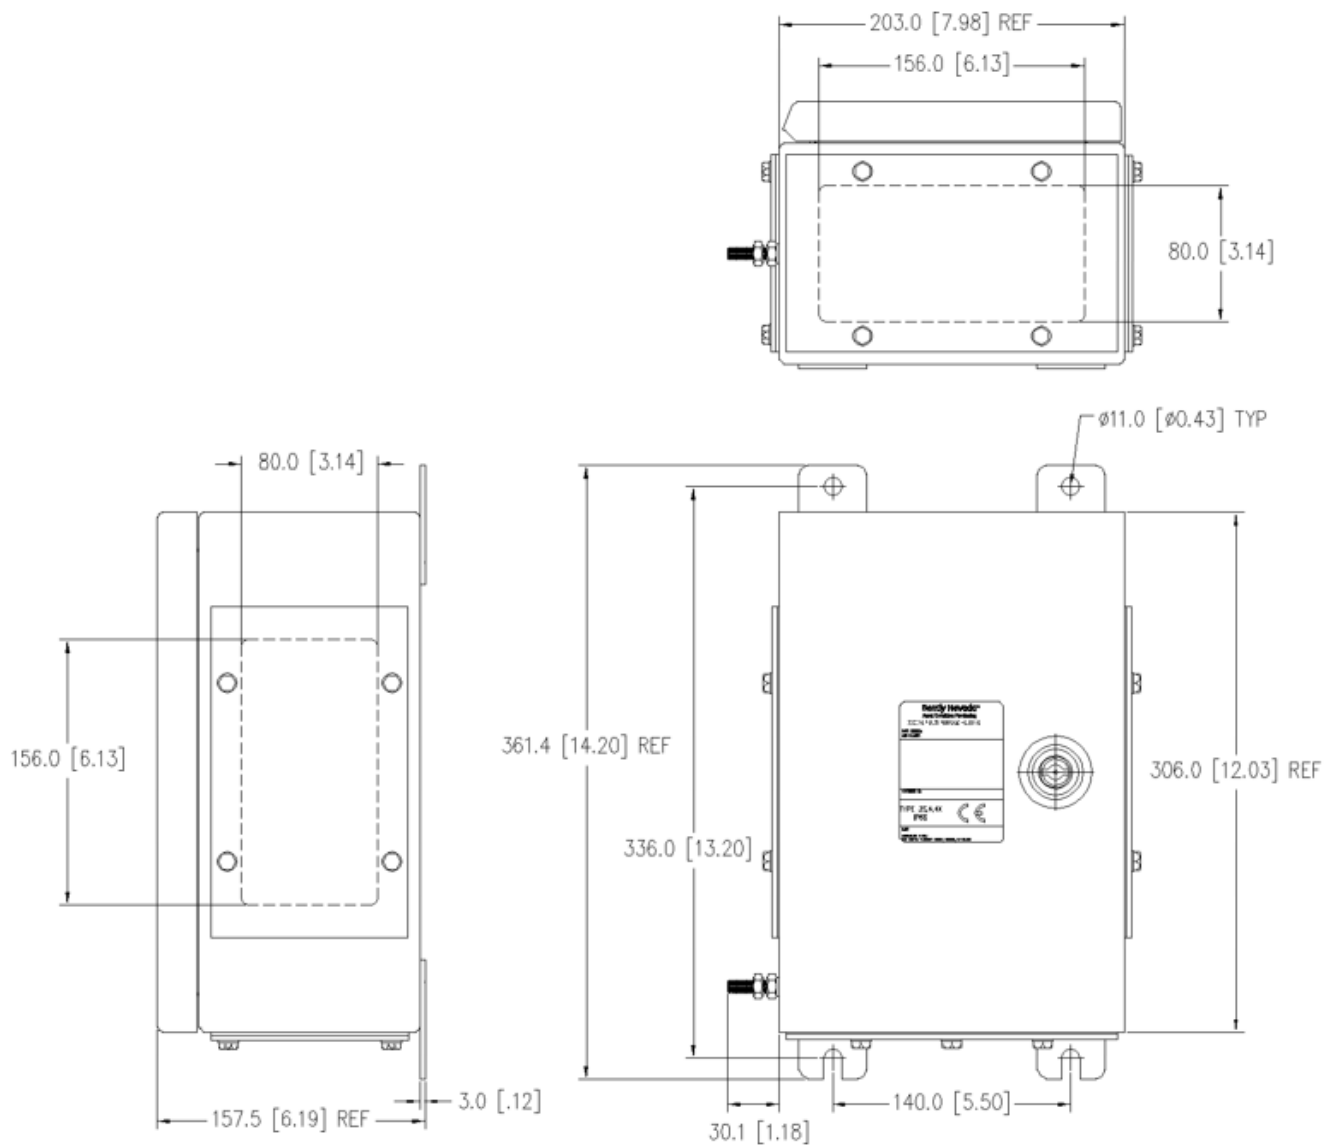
176467 3300 XL Multi-Purpose Housing Dimensions (12" x 8" x 6")
